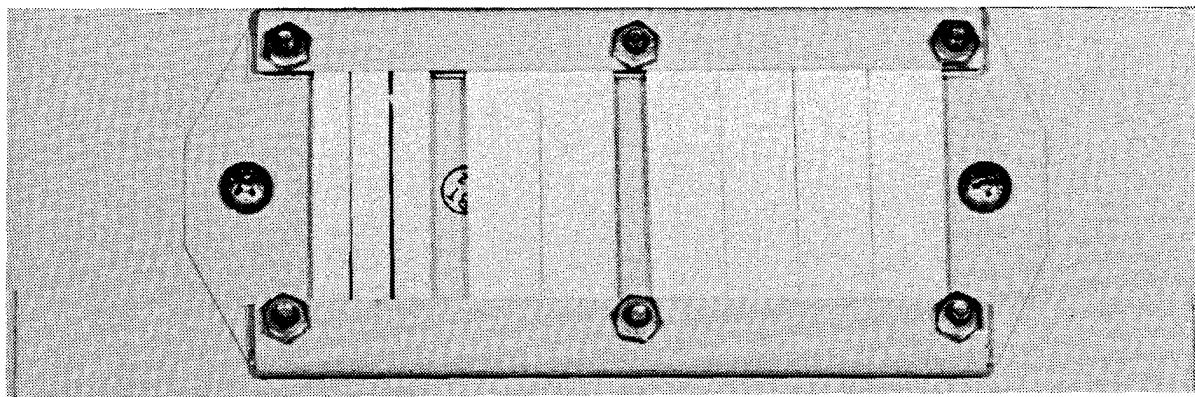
Short Beam Shear and Flexure Specimen Holding Fixture
